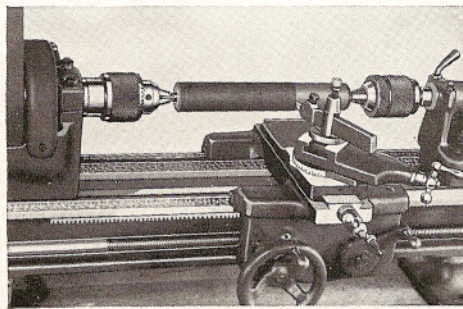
Truing a Typewriter Platen. Lathe Trues All Types of Rollers.
